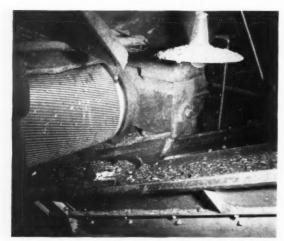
Pieces of auto tires leaving cracker roll on conveyor belt
